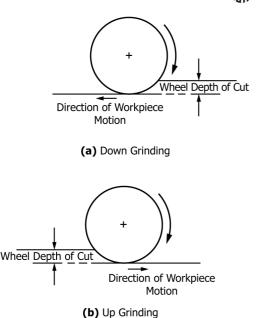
Relative Wheel and Workpiece Directions of Motion for Down Grinding and Up Grinding
